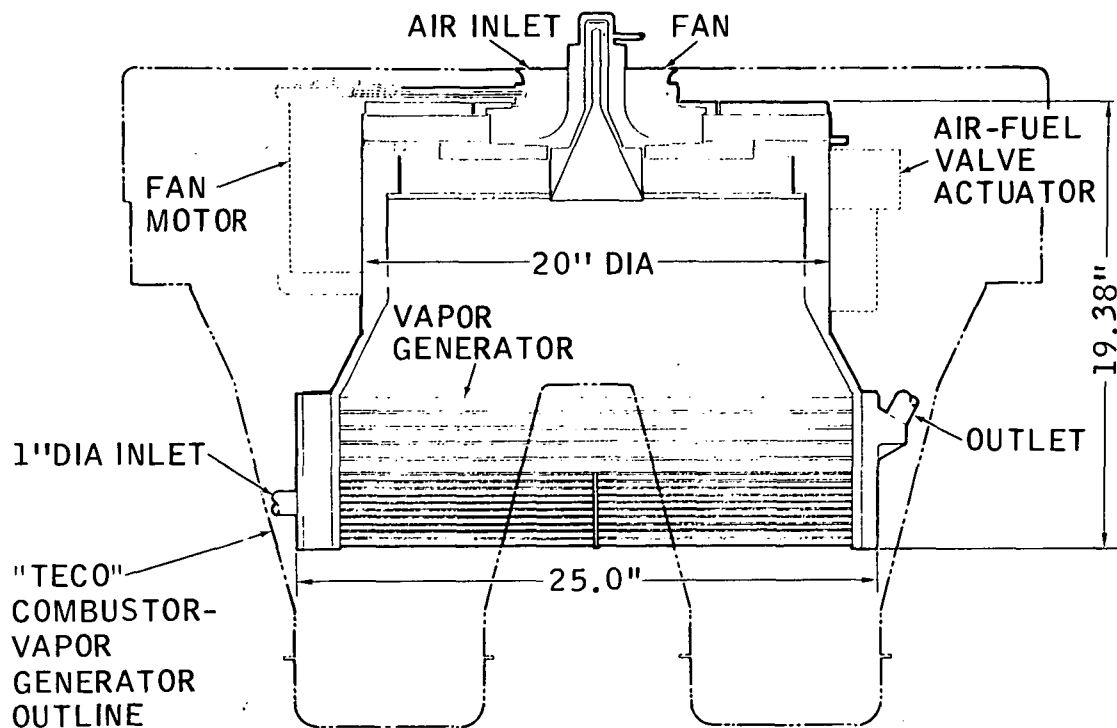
FLUORINOL-85 COMBUSTOR/VAPOR GENERATOR (FRONT VIEW)
